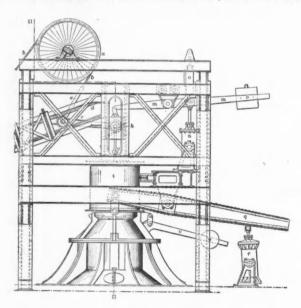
NEELAND CHARGING APPARATUS, DUQUESNE FURNACES.
